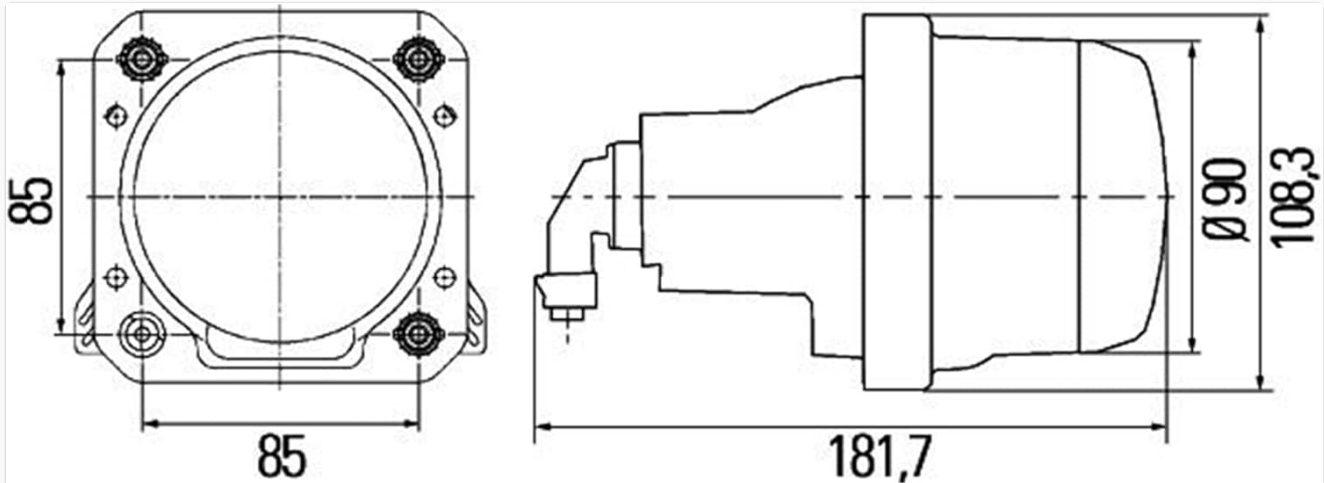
Technical drawing showing the dimensions of the HELLA 90mm Halogen/DE Headlight Module. Key dimensions include a 90mm diameter for the lens and overall length of 181.7mm.
